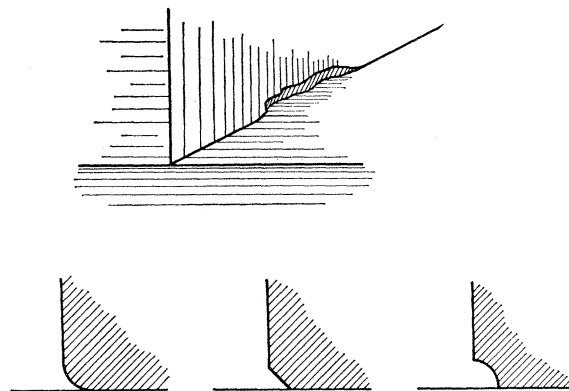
Sketch of a chip showing possible forms of fracture.
